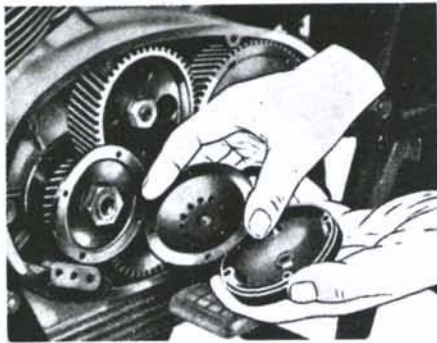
The centrifugal oil filter, located on the left end of the crankshaft, should be removed and cleaned every 6000 miles.
